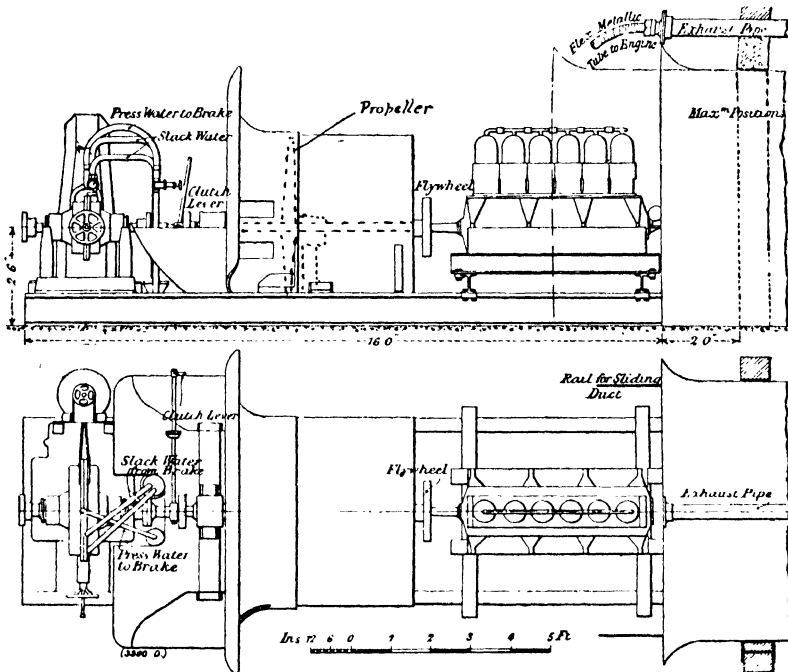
Illustrating cooling draught arrangements used in aircraft engine bench tests.
